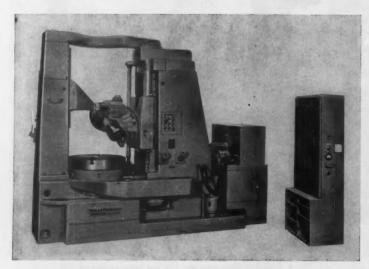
High-speed universal gear-hobbing machine for spur gears and single- and double-helical gears
